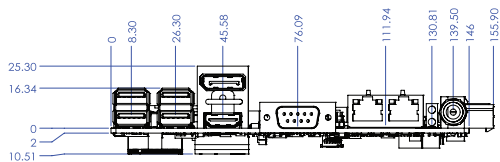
MIO-5373 Mechanical Drawing (Coastline)
